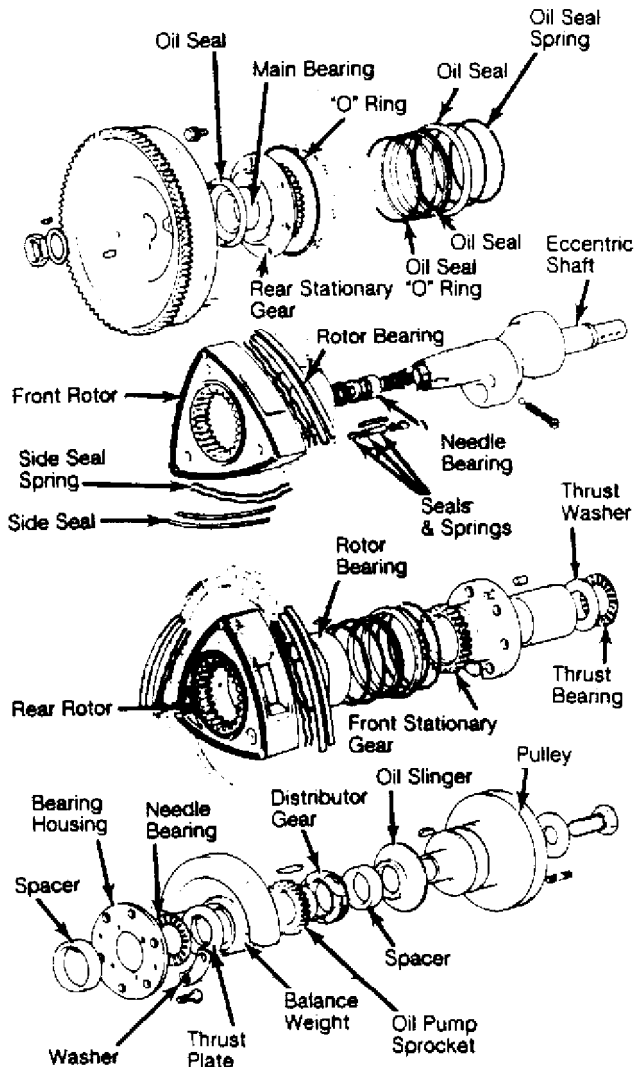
Exploded View of Rotors & Eccentric Shaft Assembly
